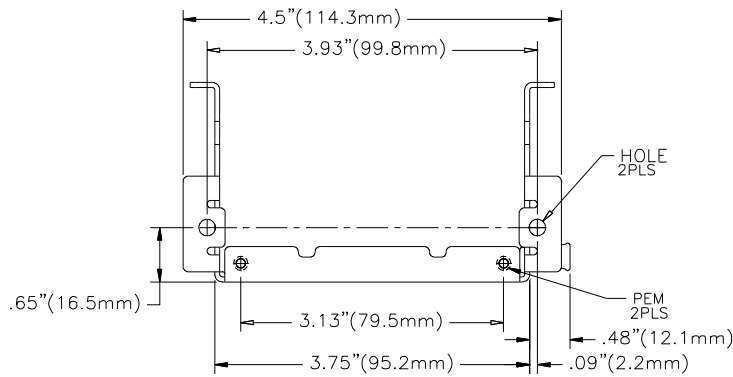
Main Chassis Mounting: Front of “Core” Printer
